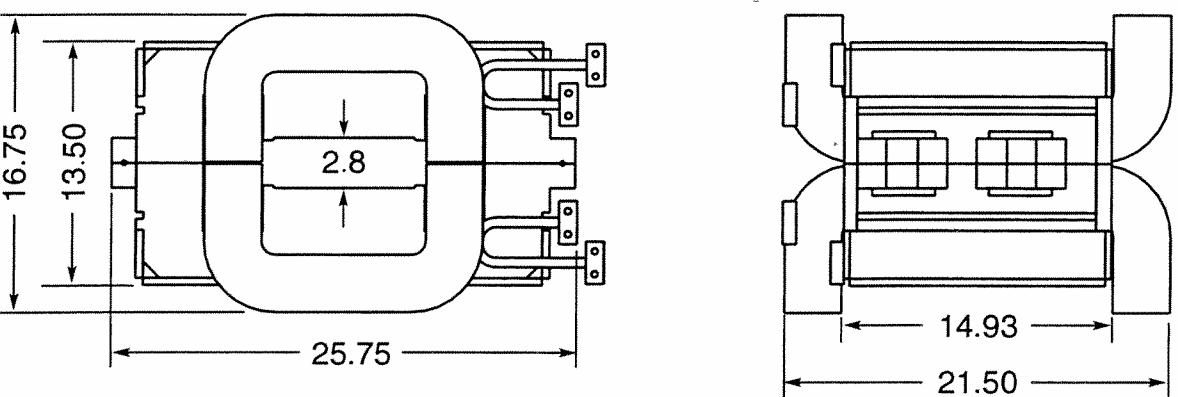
End and side views of the LER bending magnet. Dimensions are given in inches.
